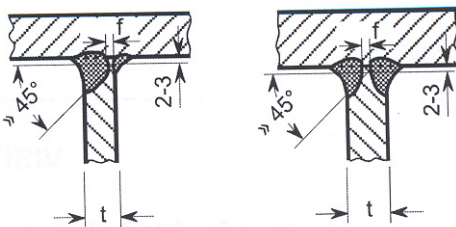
Single and double-bevel welds with defined incomplete root penetration
